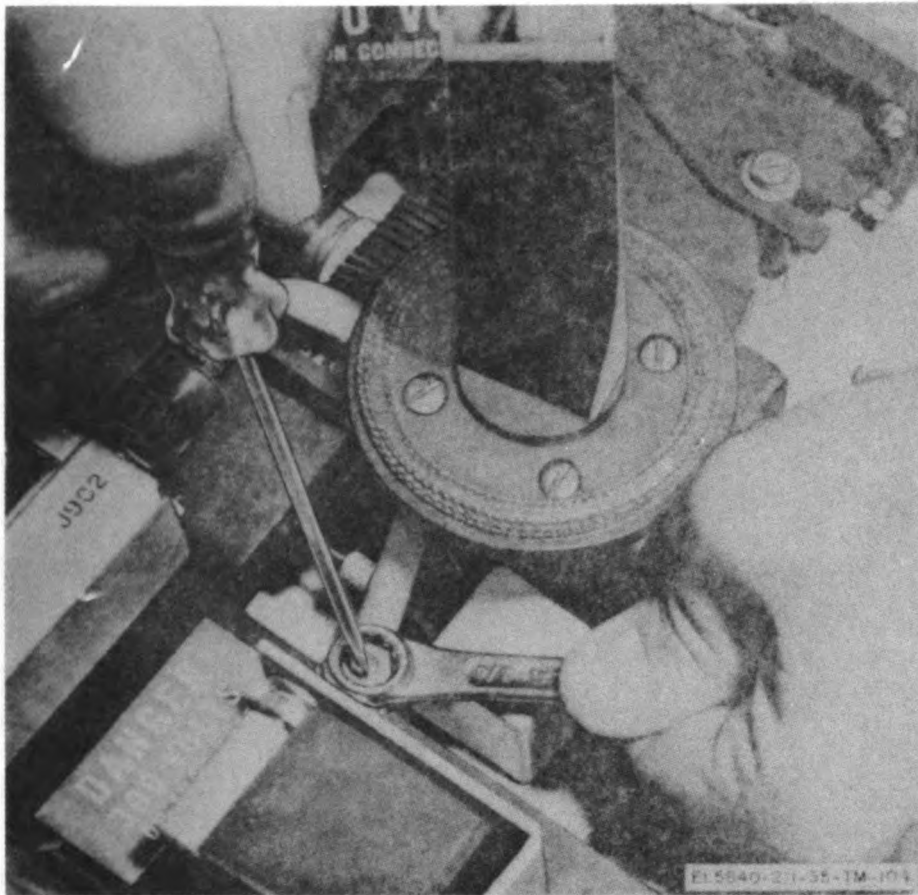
Position of 3/8-inch box wrench and screwdriver.
